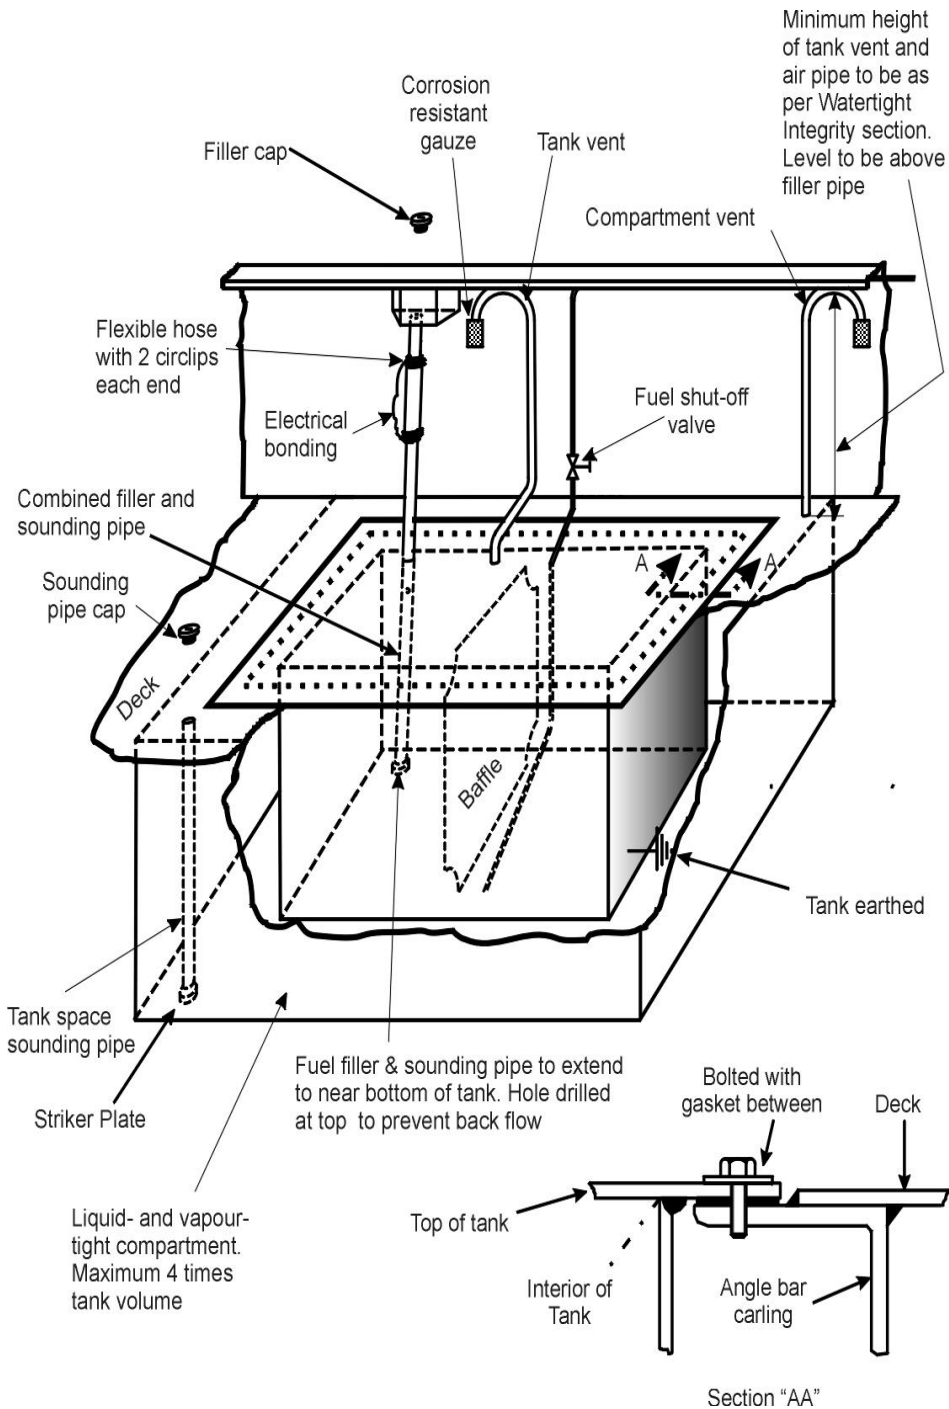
Example of an under-floor fuel tank installation for fuel with the flashpoint less than 60°C
